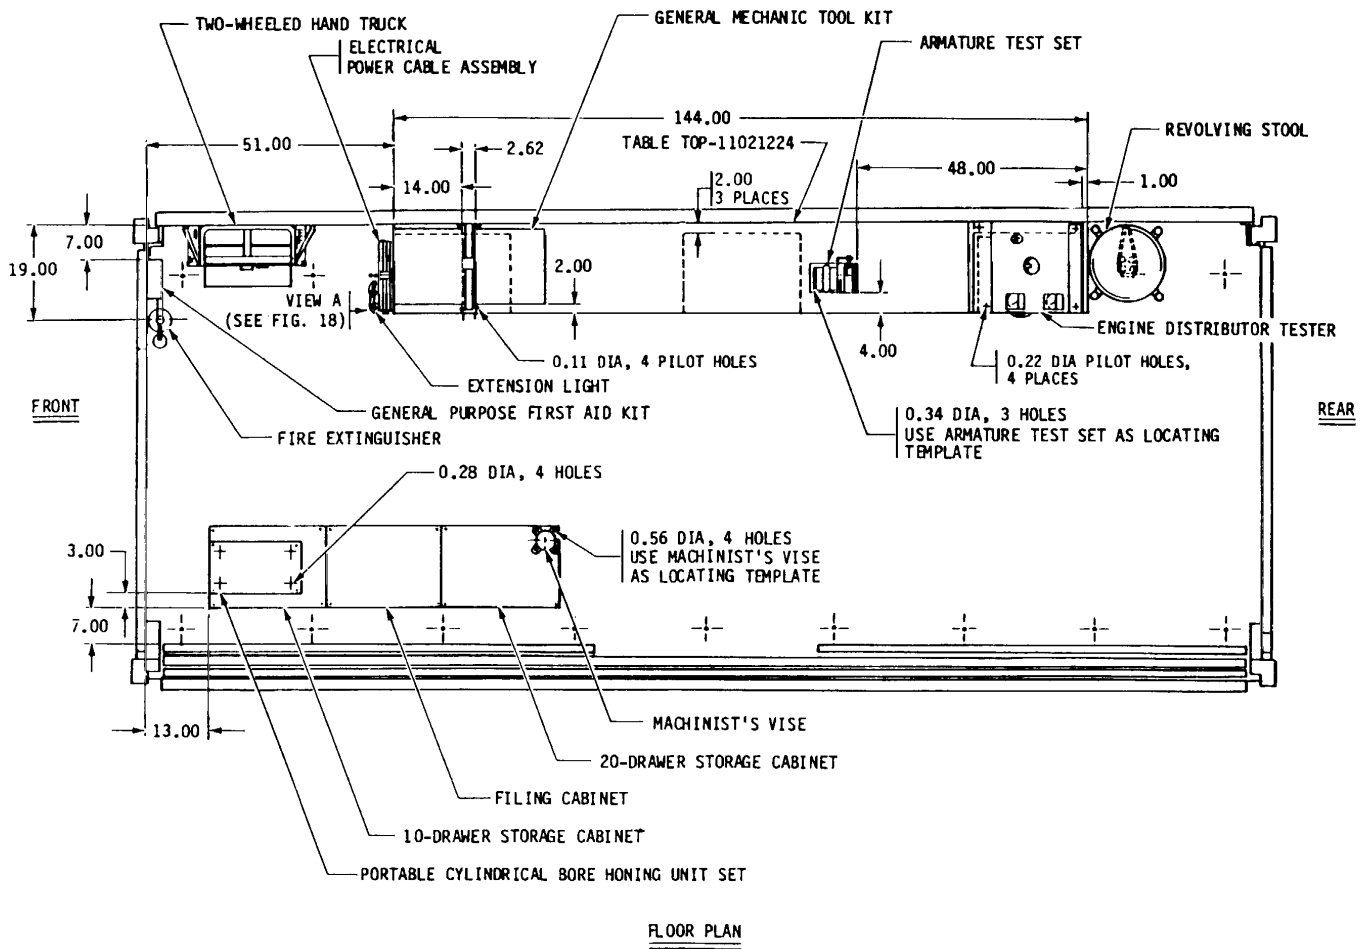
Components to be Mounted, Unit 2, ISO-2-1, Floor Plan.
